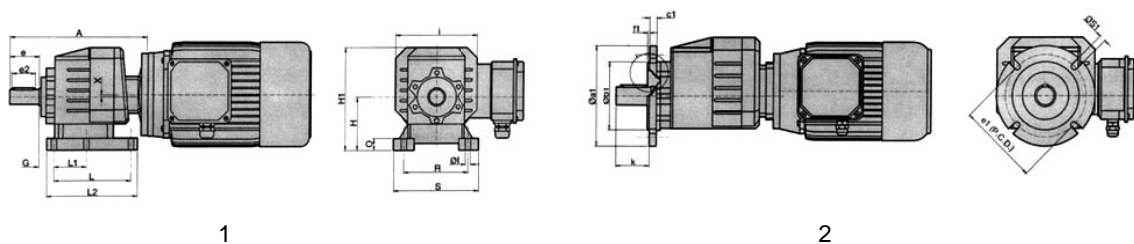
Characteristic design of universal housing types: (1) foot mounted and (2) flange mounted (Lenze solution)
